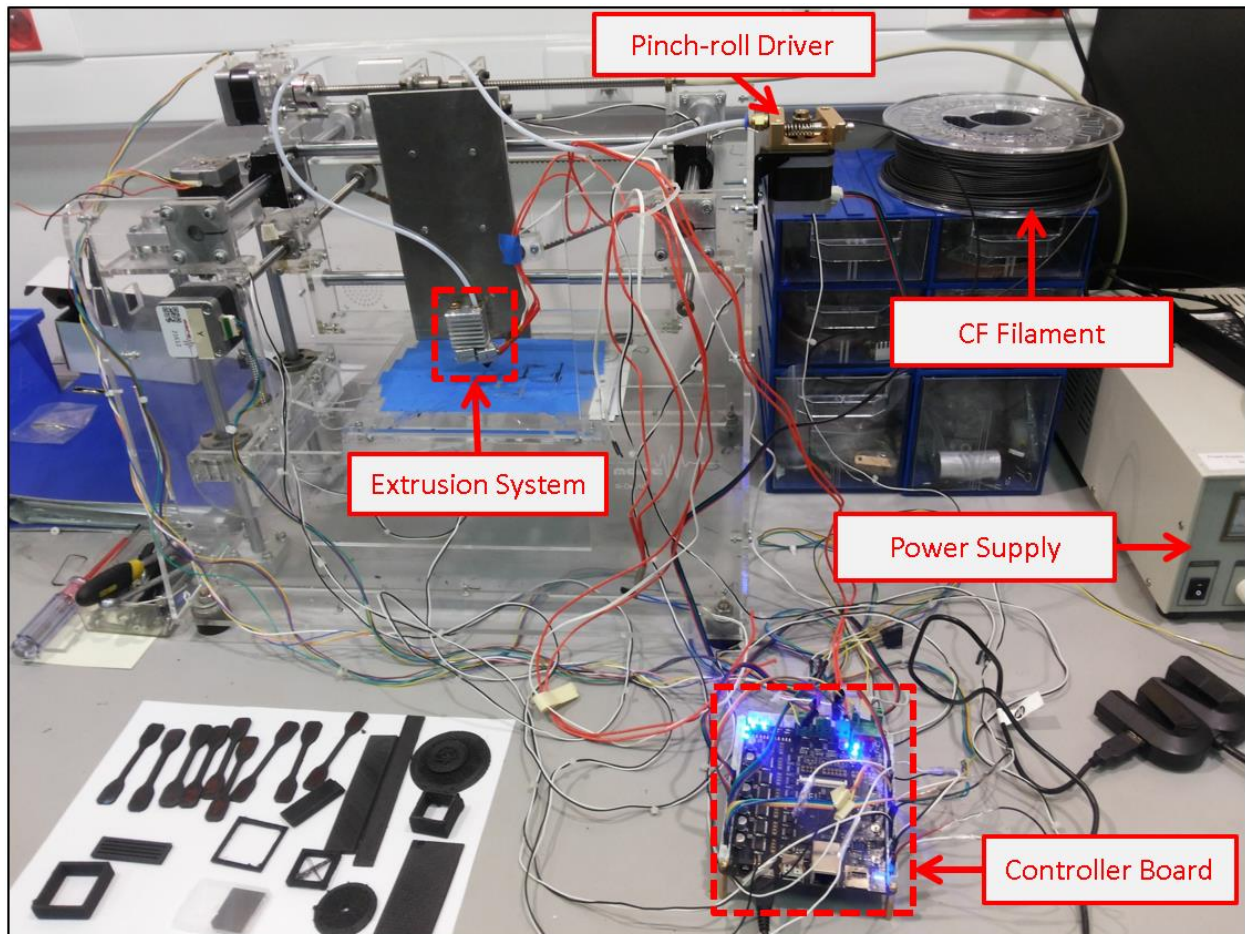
Modified AM equipment for fused filament fabrication showing important components
